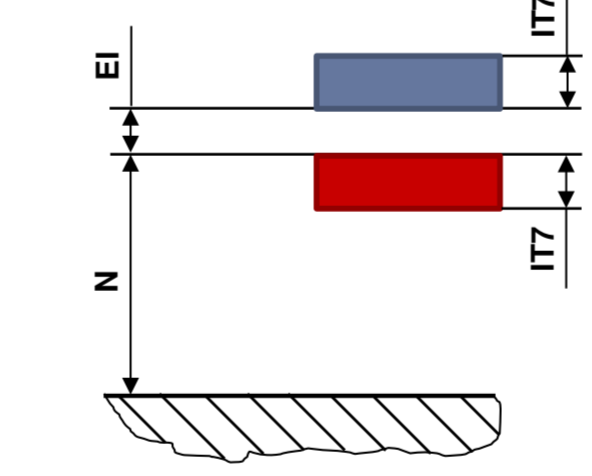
Tolerance zone IT 7 for pin (red) and hole (blue) for the same nominal dimension N
